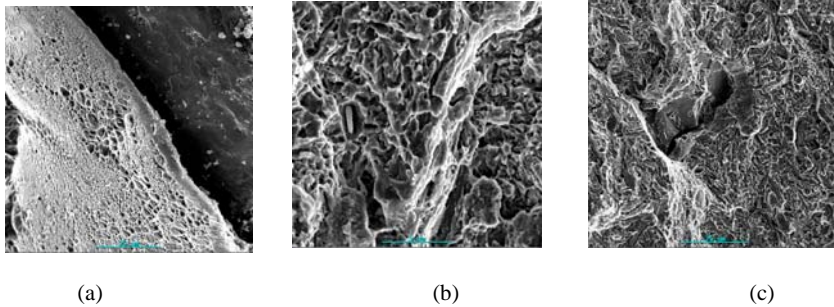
Secondary electron scanning microscopy of the shear lips showing two different modes of fracture in the same fractured surface (a) smooth shear lips with fine dimples observed near the edges of the fractured surface. (b) and (c) brittle fracture away from the edges where unstable propagation of the crack took place. Label mark 2.8 μ m.
